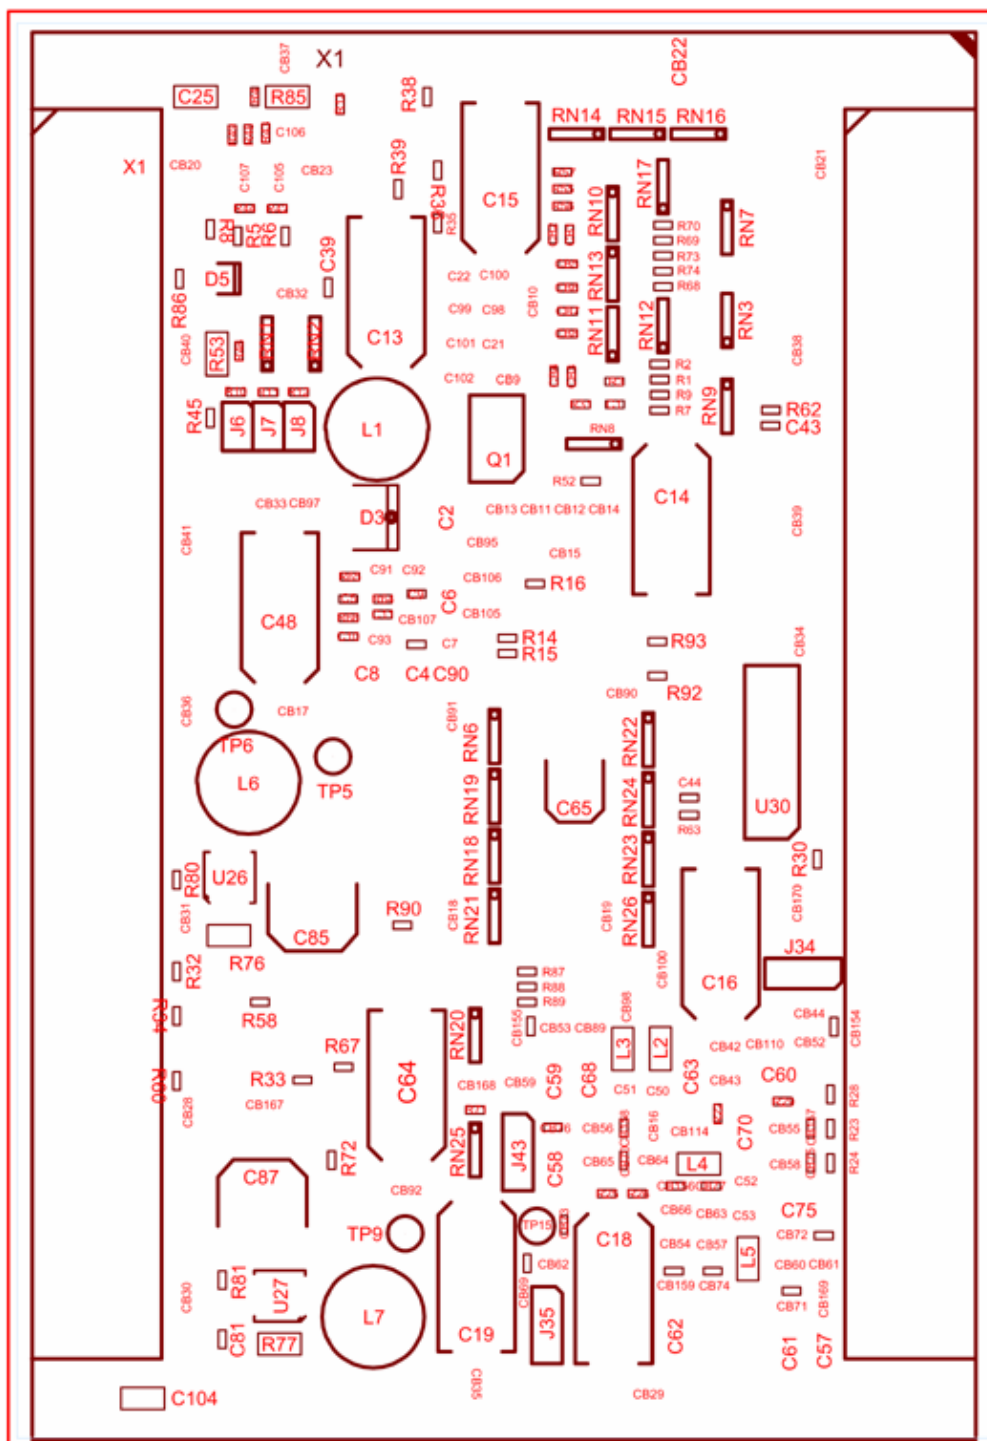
phyCORE-BF537 Component Placement, Bottom View
